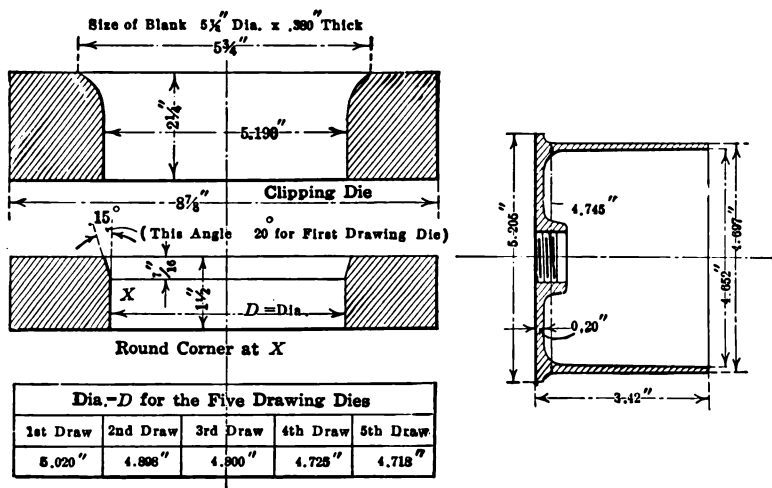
Drawing dies for 4.5 Howitzer cases
